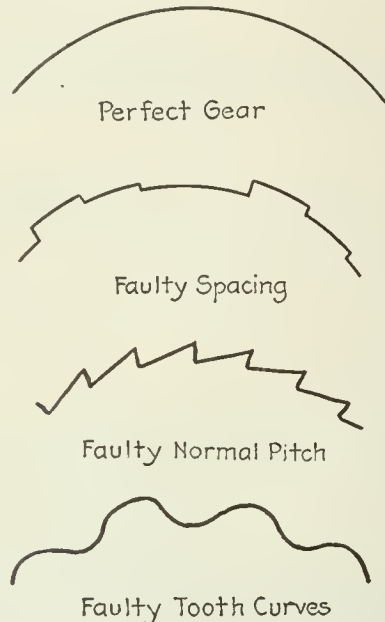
TYPES OF CHARTS PRODUCED ON SAURER MACHINE BY DIFFERENT GEAR INACCURACIES
